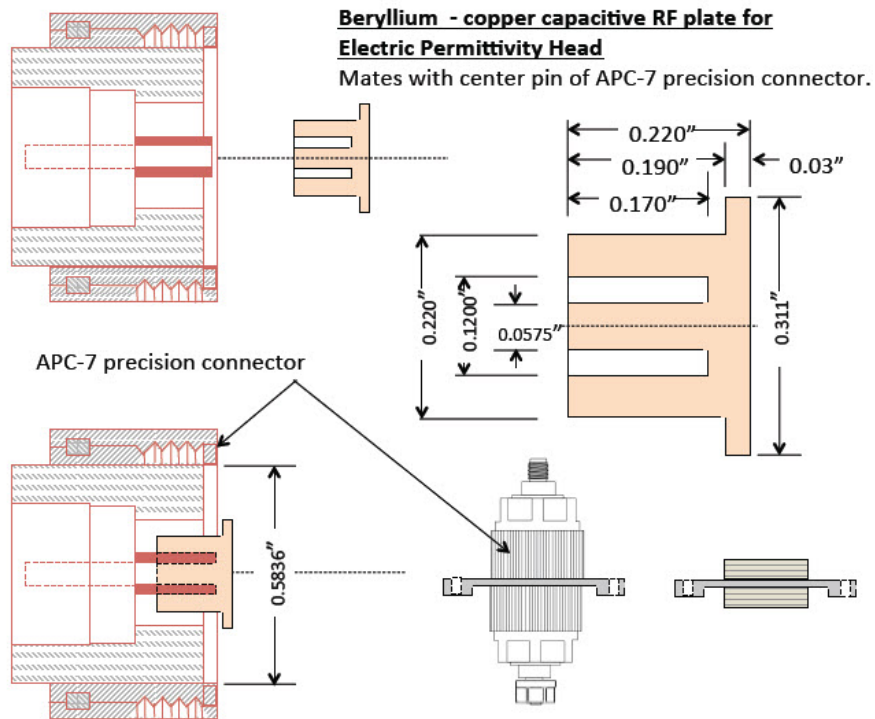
Drawing of the capacitive plate electric permittivity probe head. The custom capacitive plates fit onto the center conductor of the APC-7 connectors. The connectors fasten to the custom stainless steel sleeve forming the body of the probe head. The connectors tighten down, holding the sample is securely in place.
